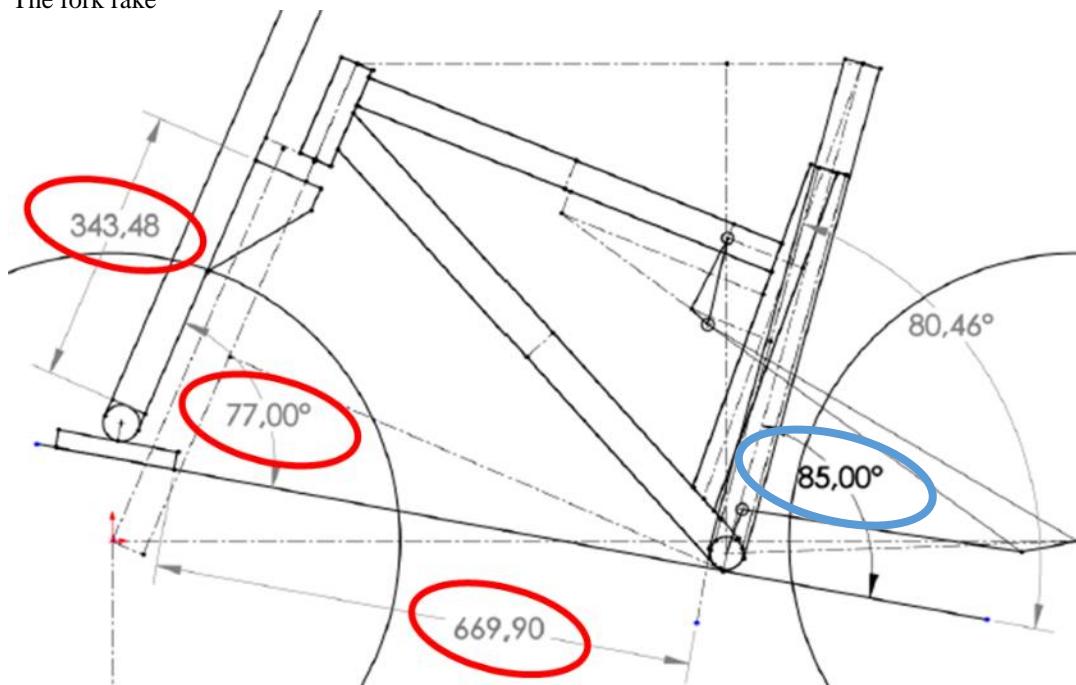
Setting parameters for the current welding-jig for tailor-made frame
